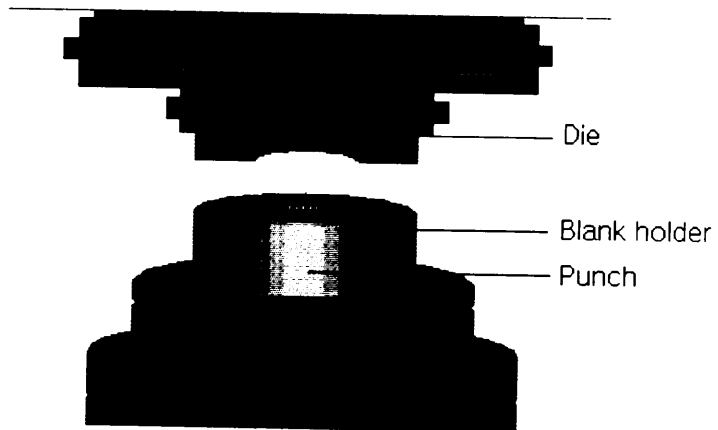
Cross-sectional view of geometric description of the tooling for deep drawing
